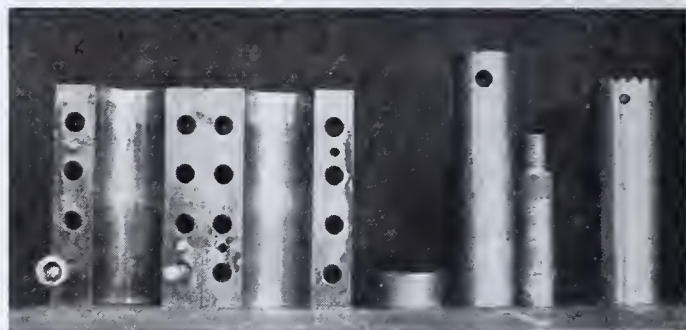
CRUCIBLE MOLD DISASSEMBLED
